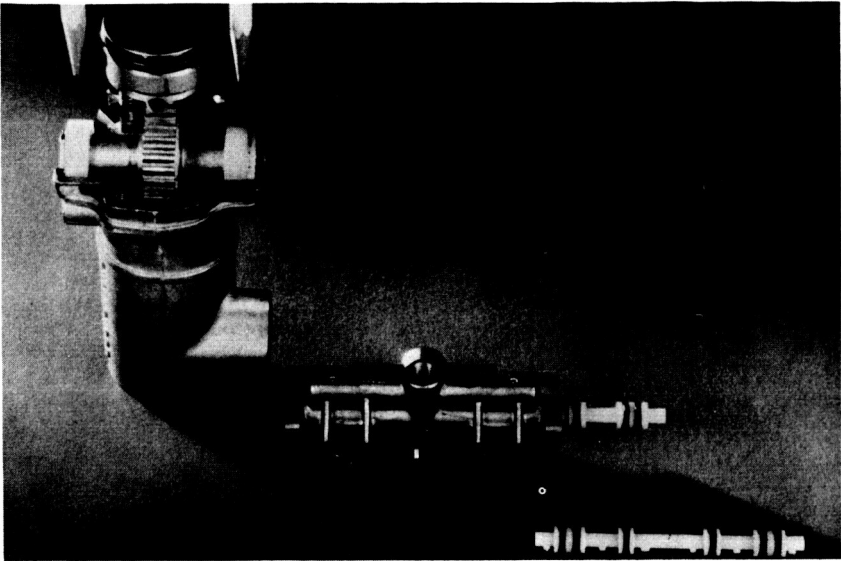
Self-aligning bearings of zytel nylon resin.
